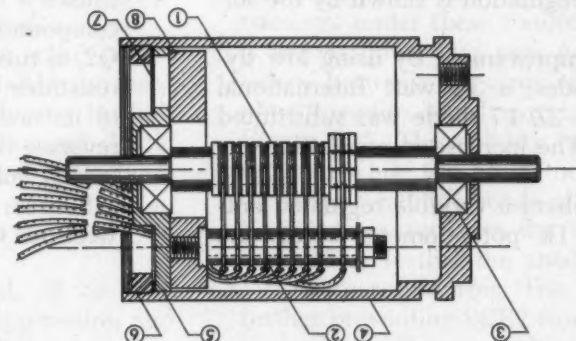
LOW-TORQUE SWITCH construction in #10 synchro case includes: (1) Slip ring and commutator assembly, (2) brush block, (3) precision ball bearings, (4) housing, (5) end plate, (6) retaining ring, (7) retaining spring, (8) brush block mounting plate.
